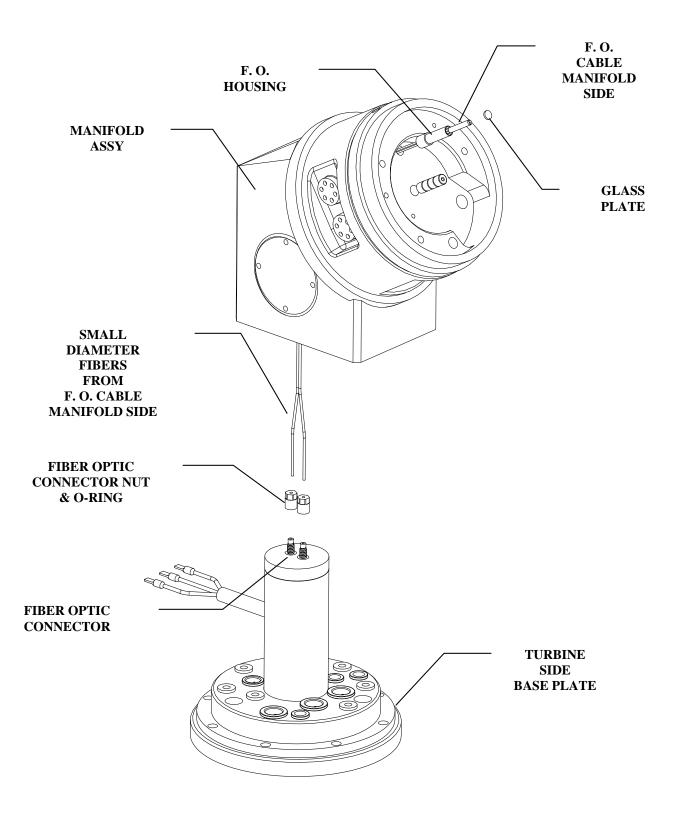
Fiber Optic Cable Assy, Manifold & P-Extension
